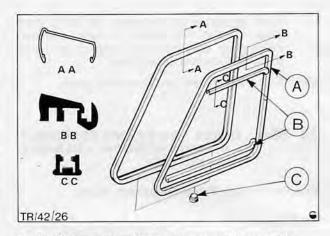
Sliding window frame and weatherstrip assembly A - Weatherstrip
